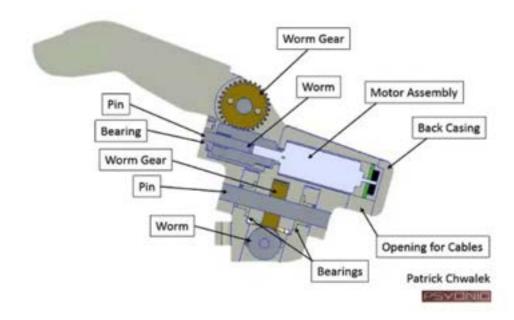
A prosthetic design that uses a gear and a linear motor to move the finger.
